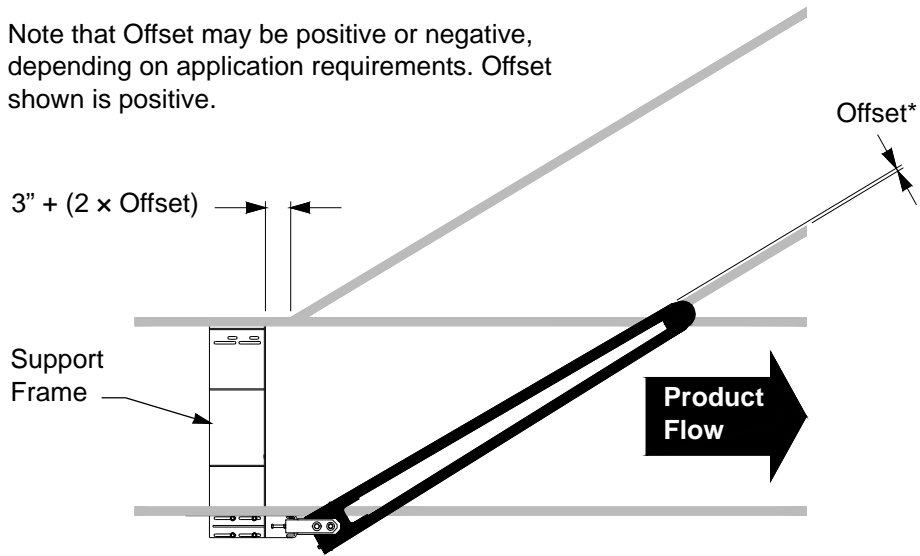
Determining the Installation Location – Opposite Side Installation
